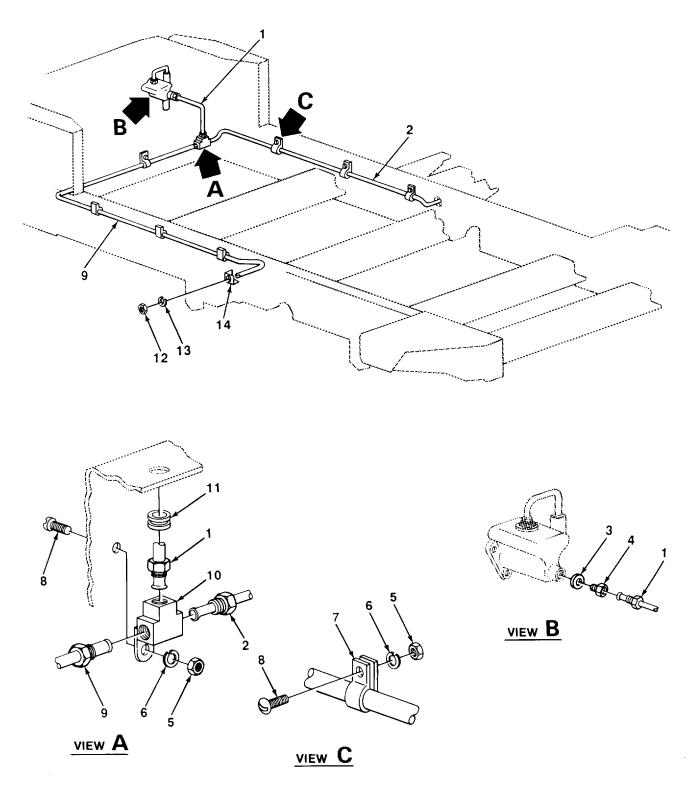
HYDRAULIC TUBES AND FITTINGS.
